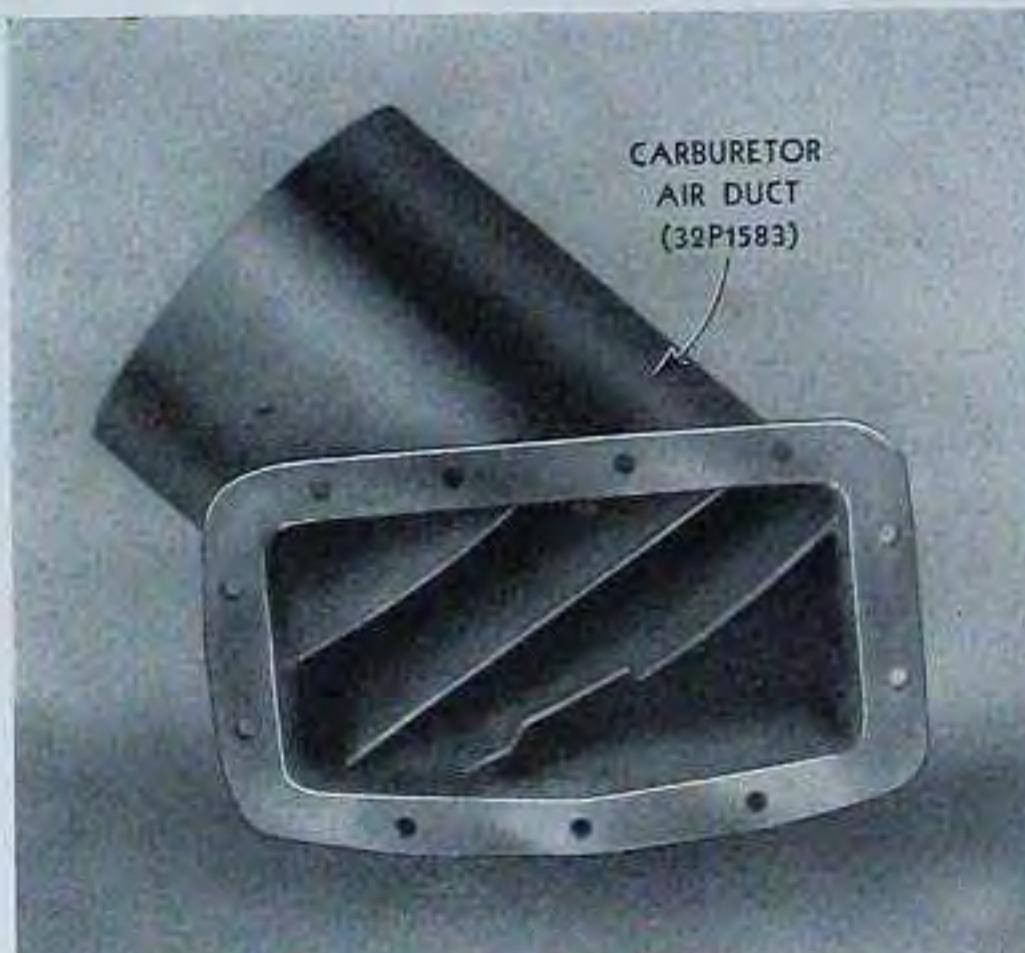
Cast-In Vane Carburetor Air Duct, Rear View
